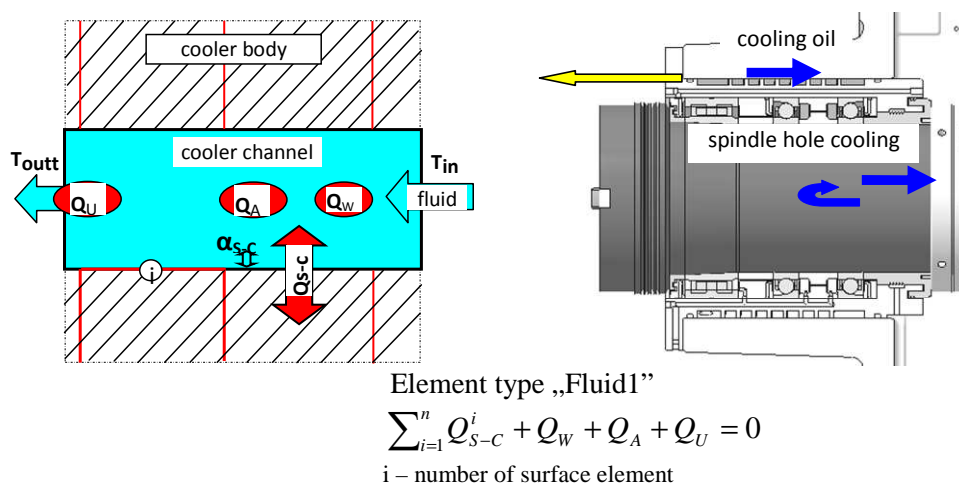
Model of heat exchange in a bearing cooler and in a spindle hole cooler
